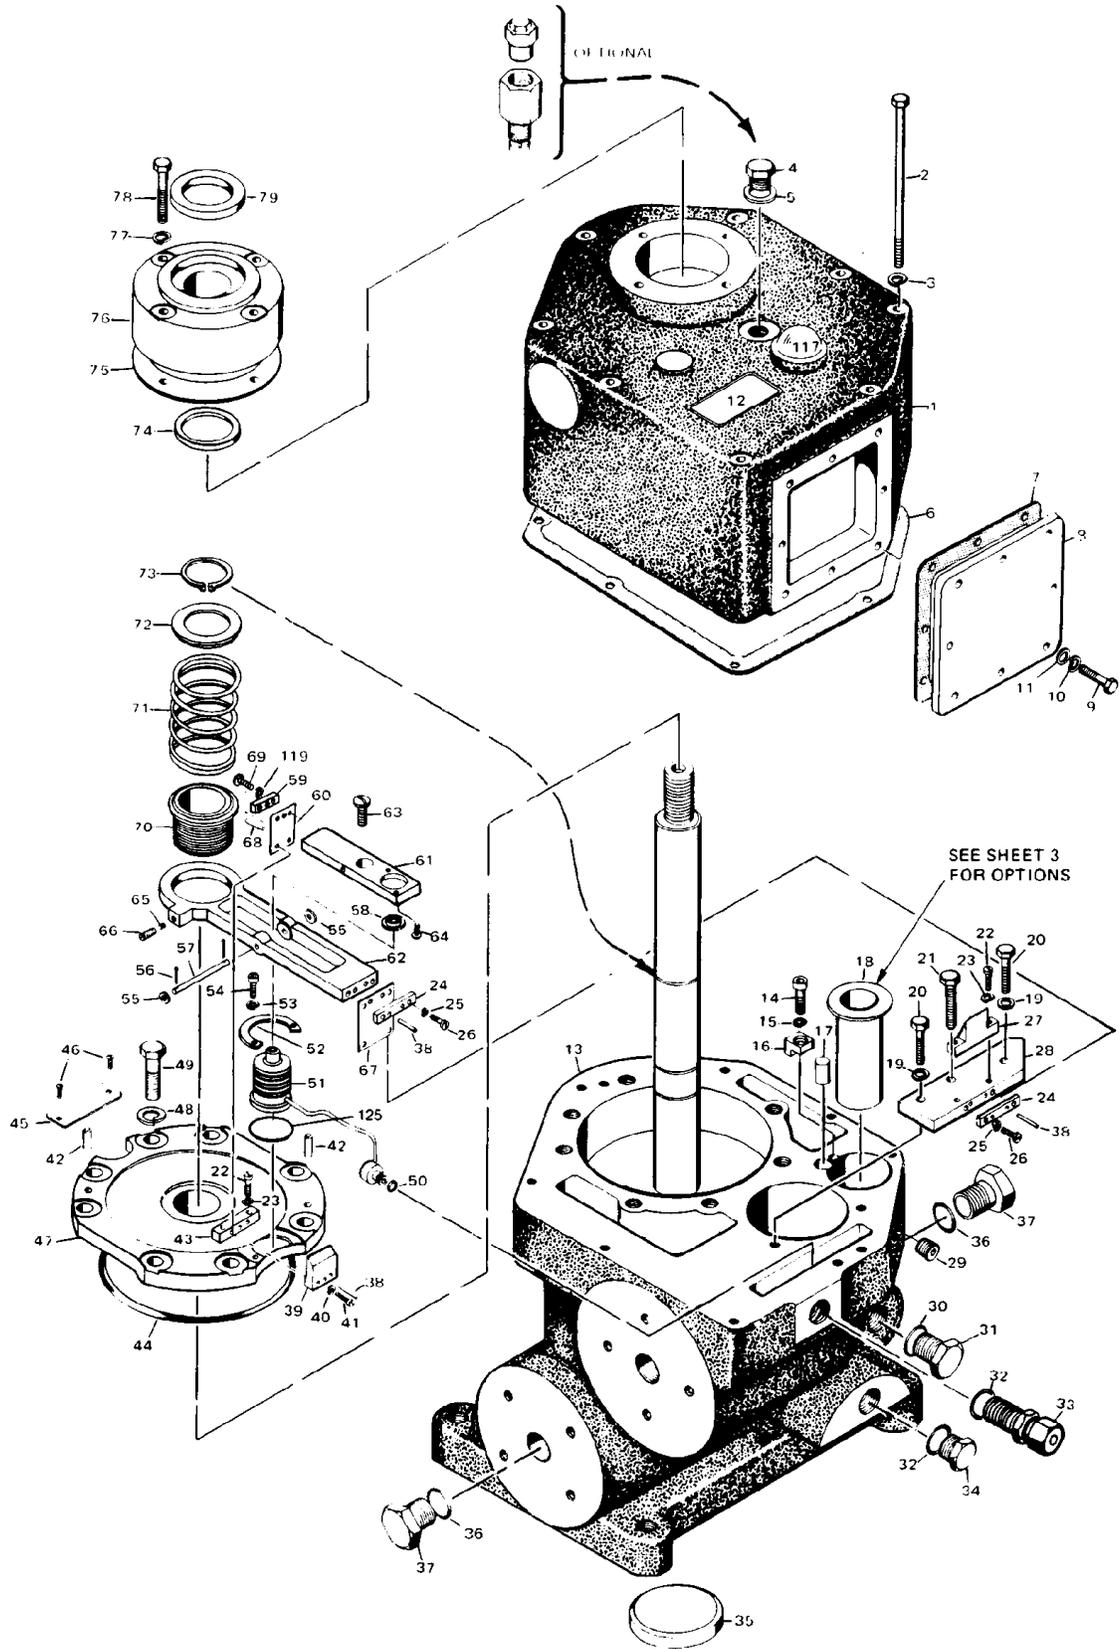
Exploded View of the Hydraulic Amplifier
